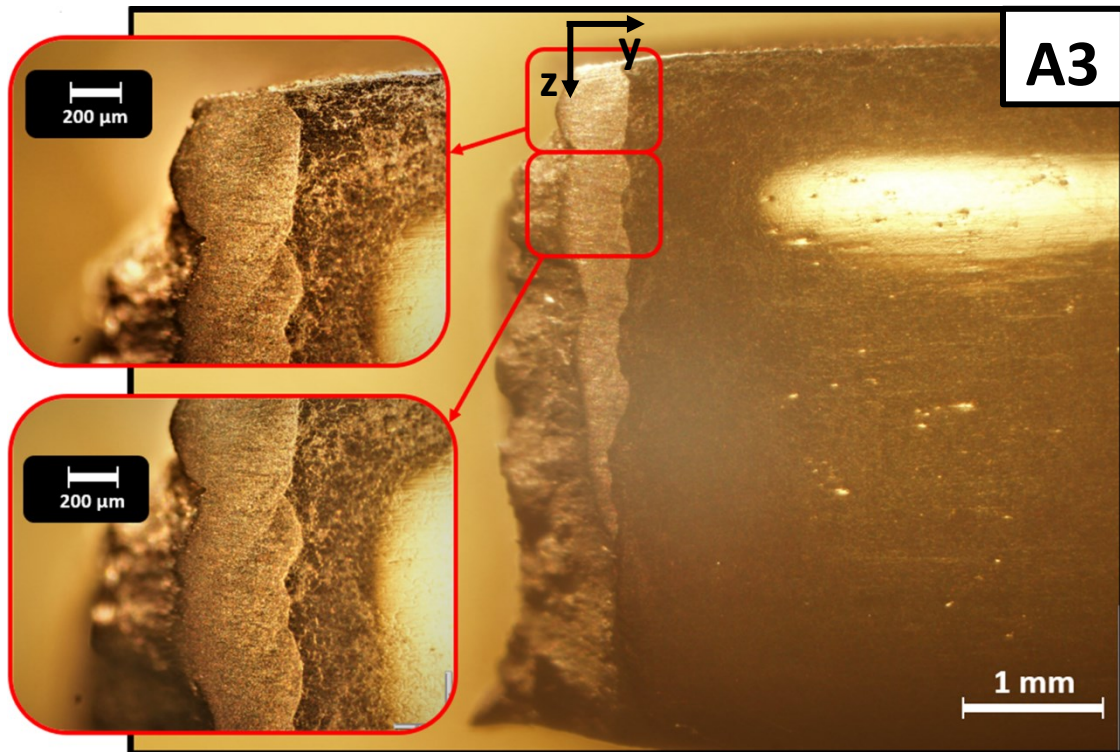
Sample A3 (249.8 J/mm) fractured through weld zone observed by optical microscope after etching showed less ductile characteristics
